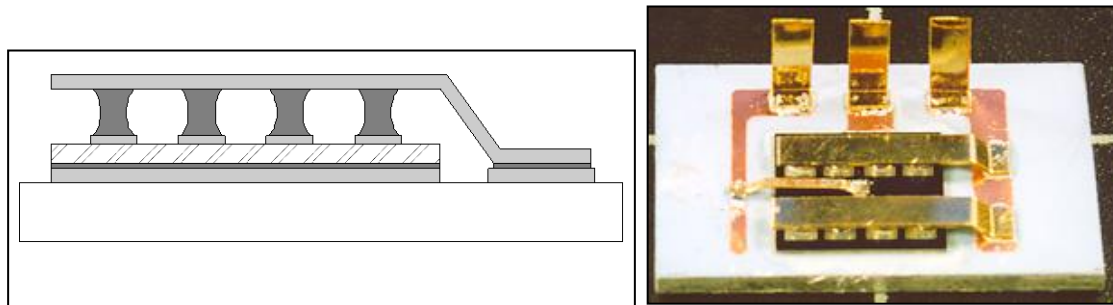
Schematic cross-section and picture of an IGBT with solder bumps on the top emitter pads.
